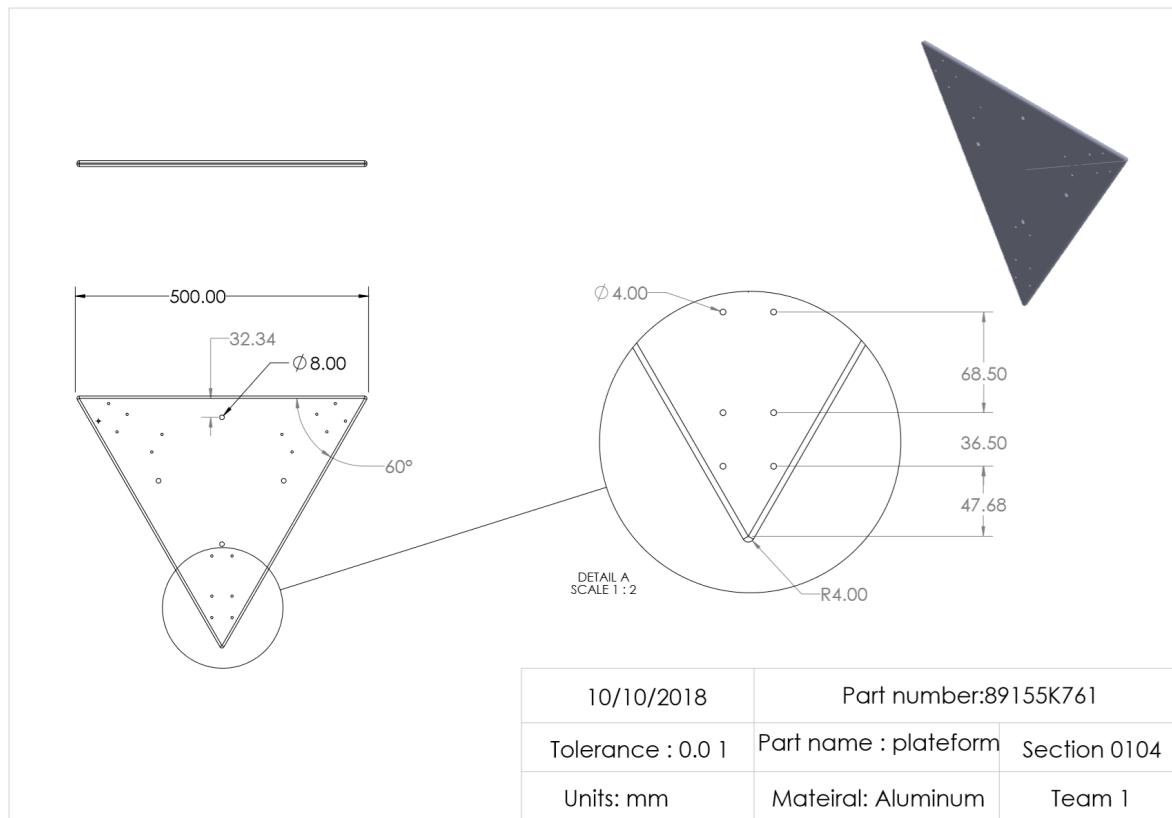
Engineering drawing of the robot platform with bolt holes for the robot
